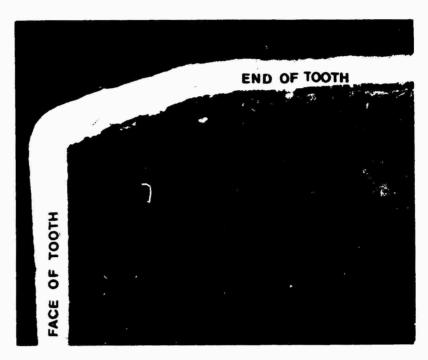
Profile Section Showing Chamfer at End of Ring Gear Tooth (P/N 204-040-331-5).
